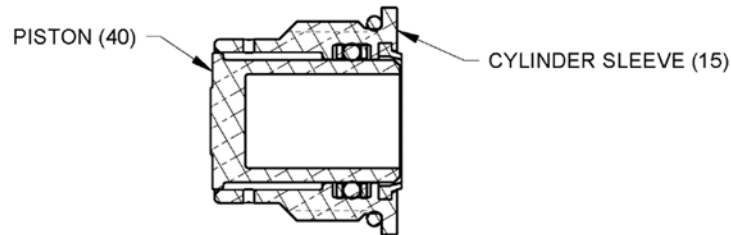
Insert the piston (40) into the cylinder sleeve (15)
